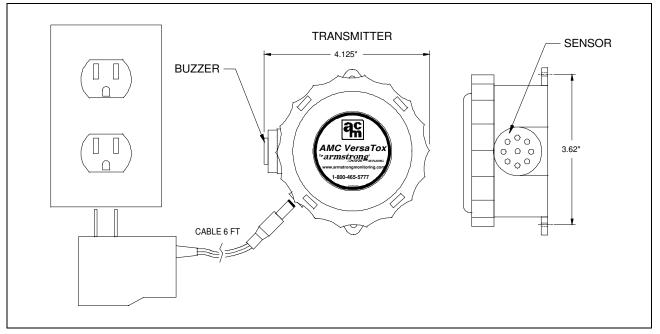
120VAC Power Supply with Buzzer Mounting
